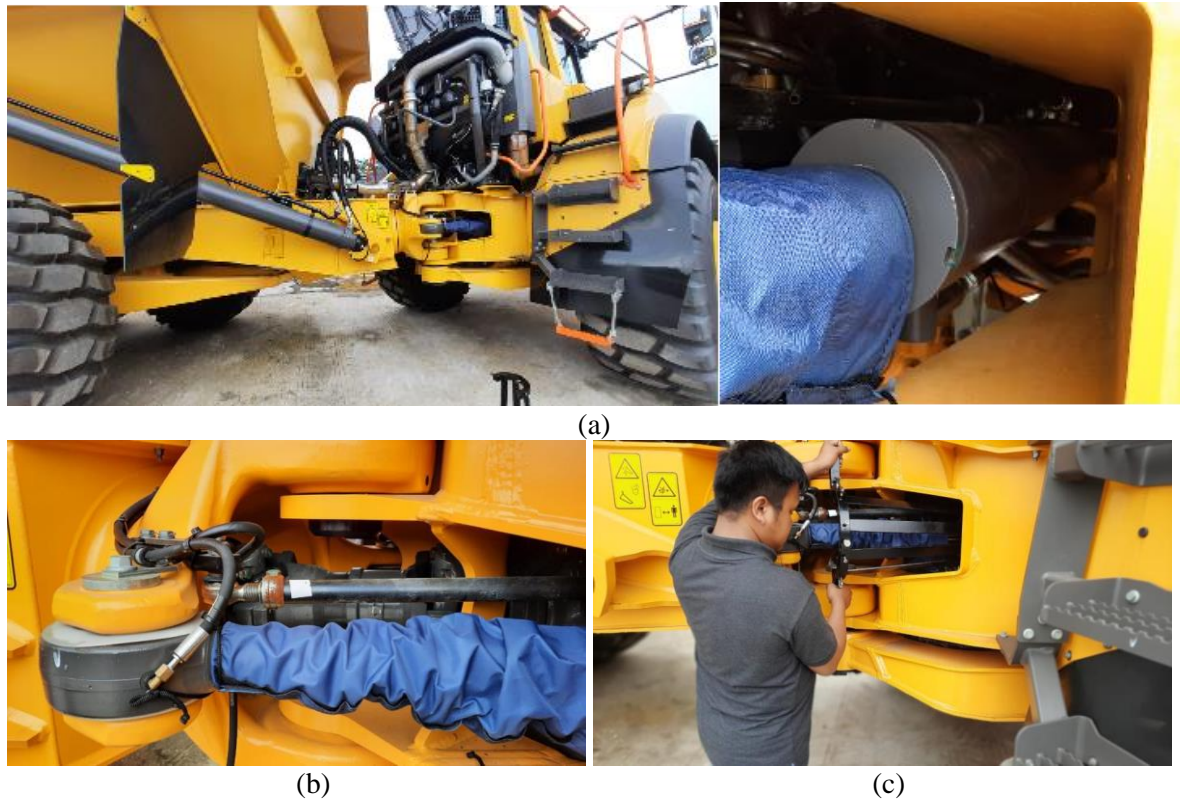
Usage illustration of the universal C-Wrench special service tool for assembly and disassembly of hydraulic cylinder nut covers (a) location of the hydraulic cylinder, covered in blue, (b) detailed location of hydraulic cylinder, clearance of working area, and (c) disassembly of hydraulic cylinder.
